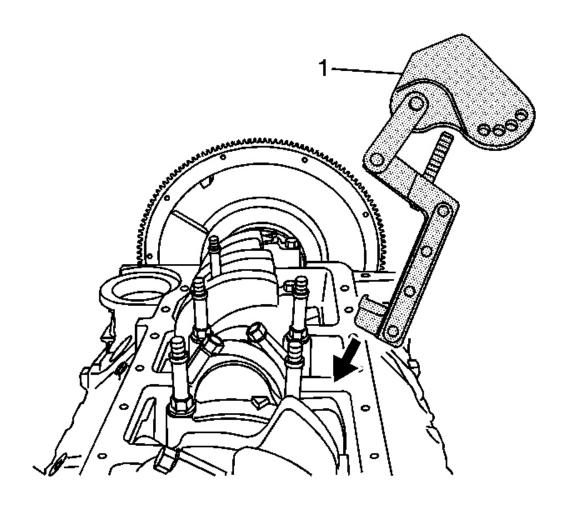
Pivot Arm Assembly & Connecting Rod Courtesy of GENERAL MOTORS CORP.
